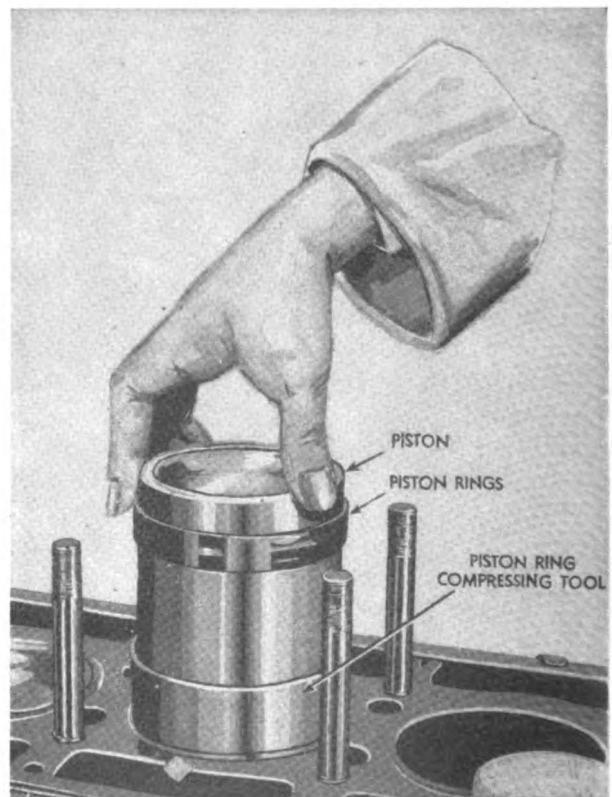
Installing piston in cylinder bore with funnel type piston ring compressor.
